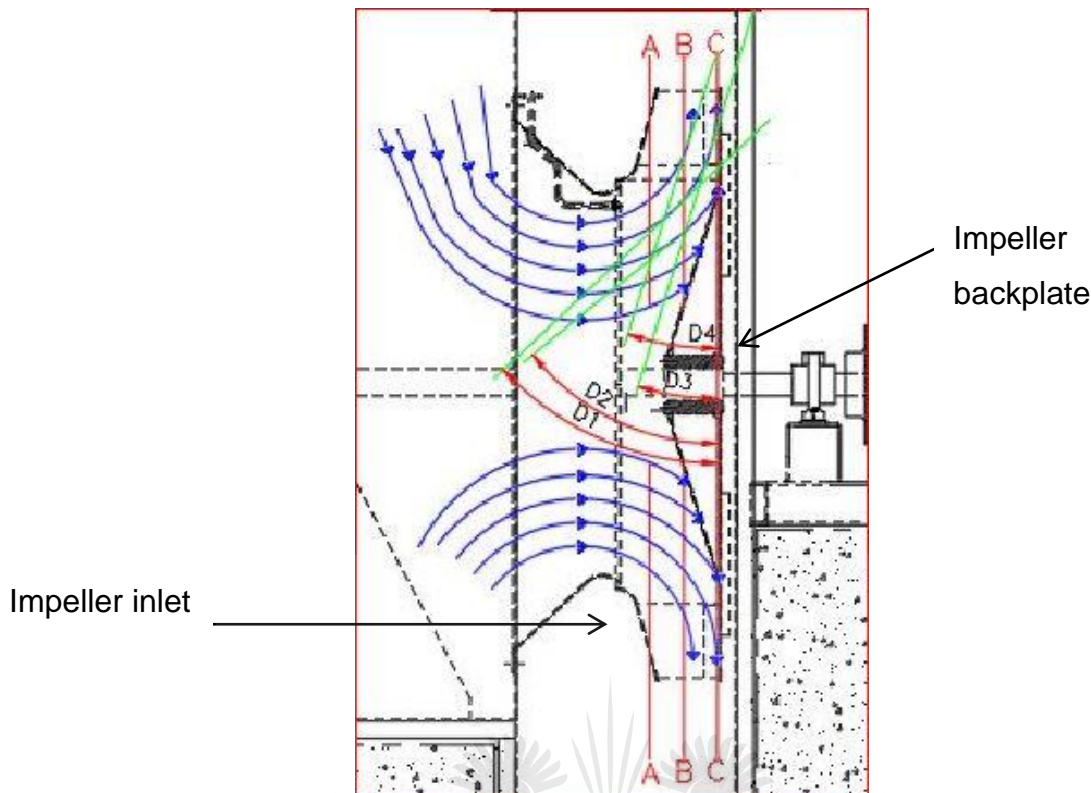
2: Detail view "A" showing enlarged measuring points of impingement angle taken the from fan section view in Figure 3-1.
